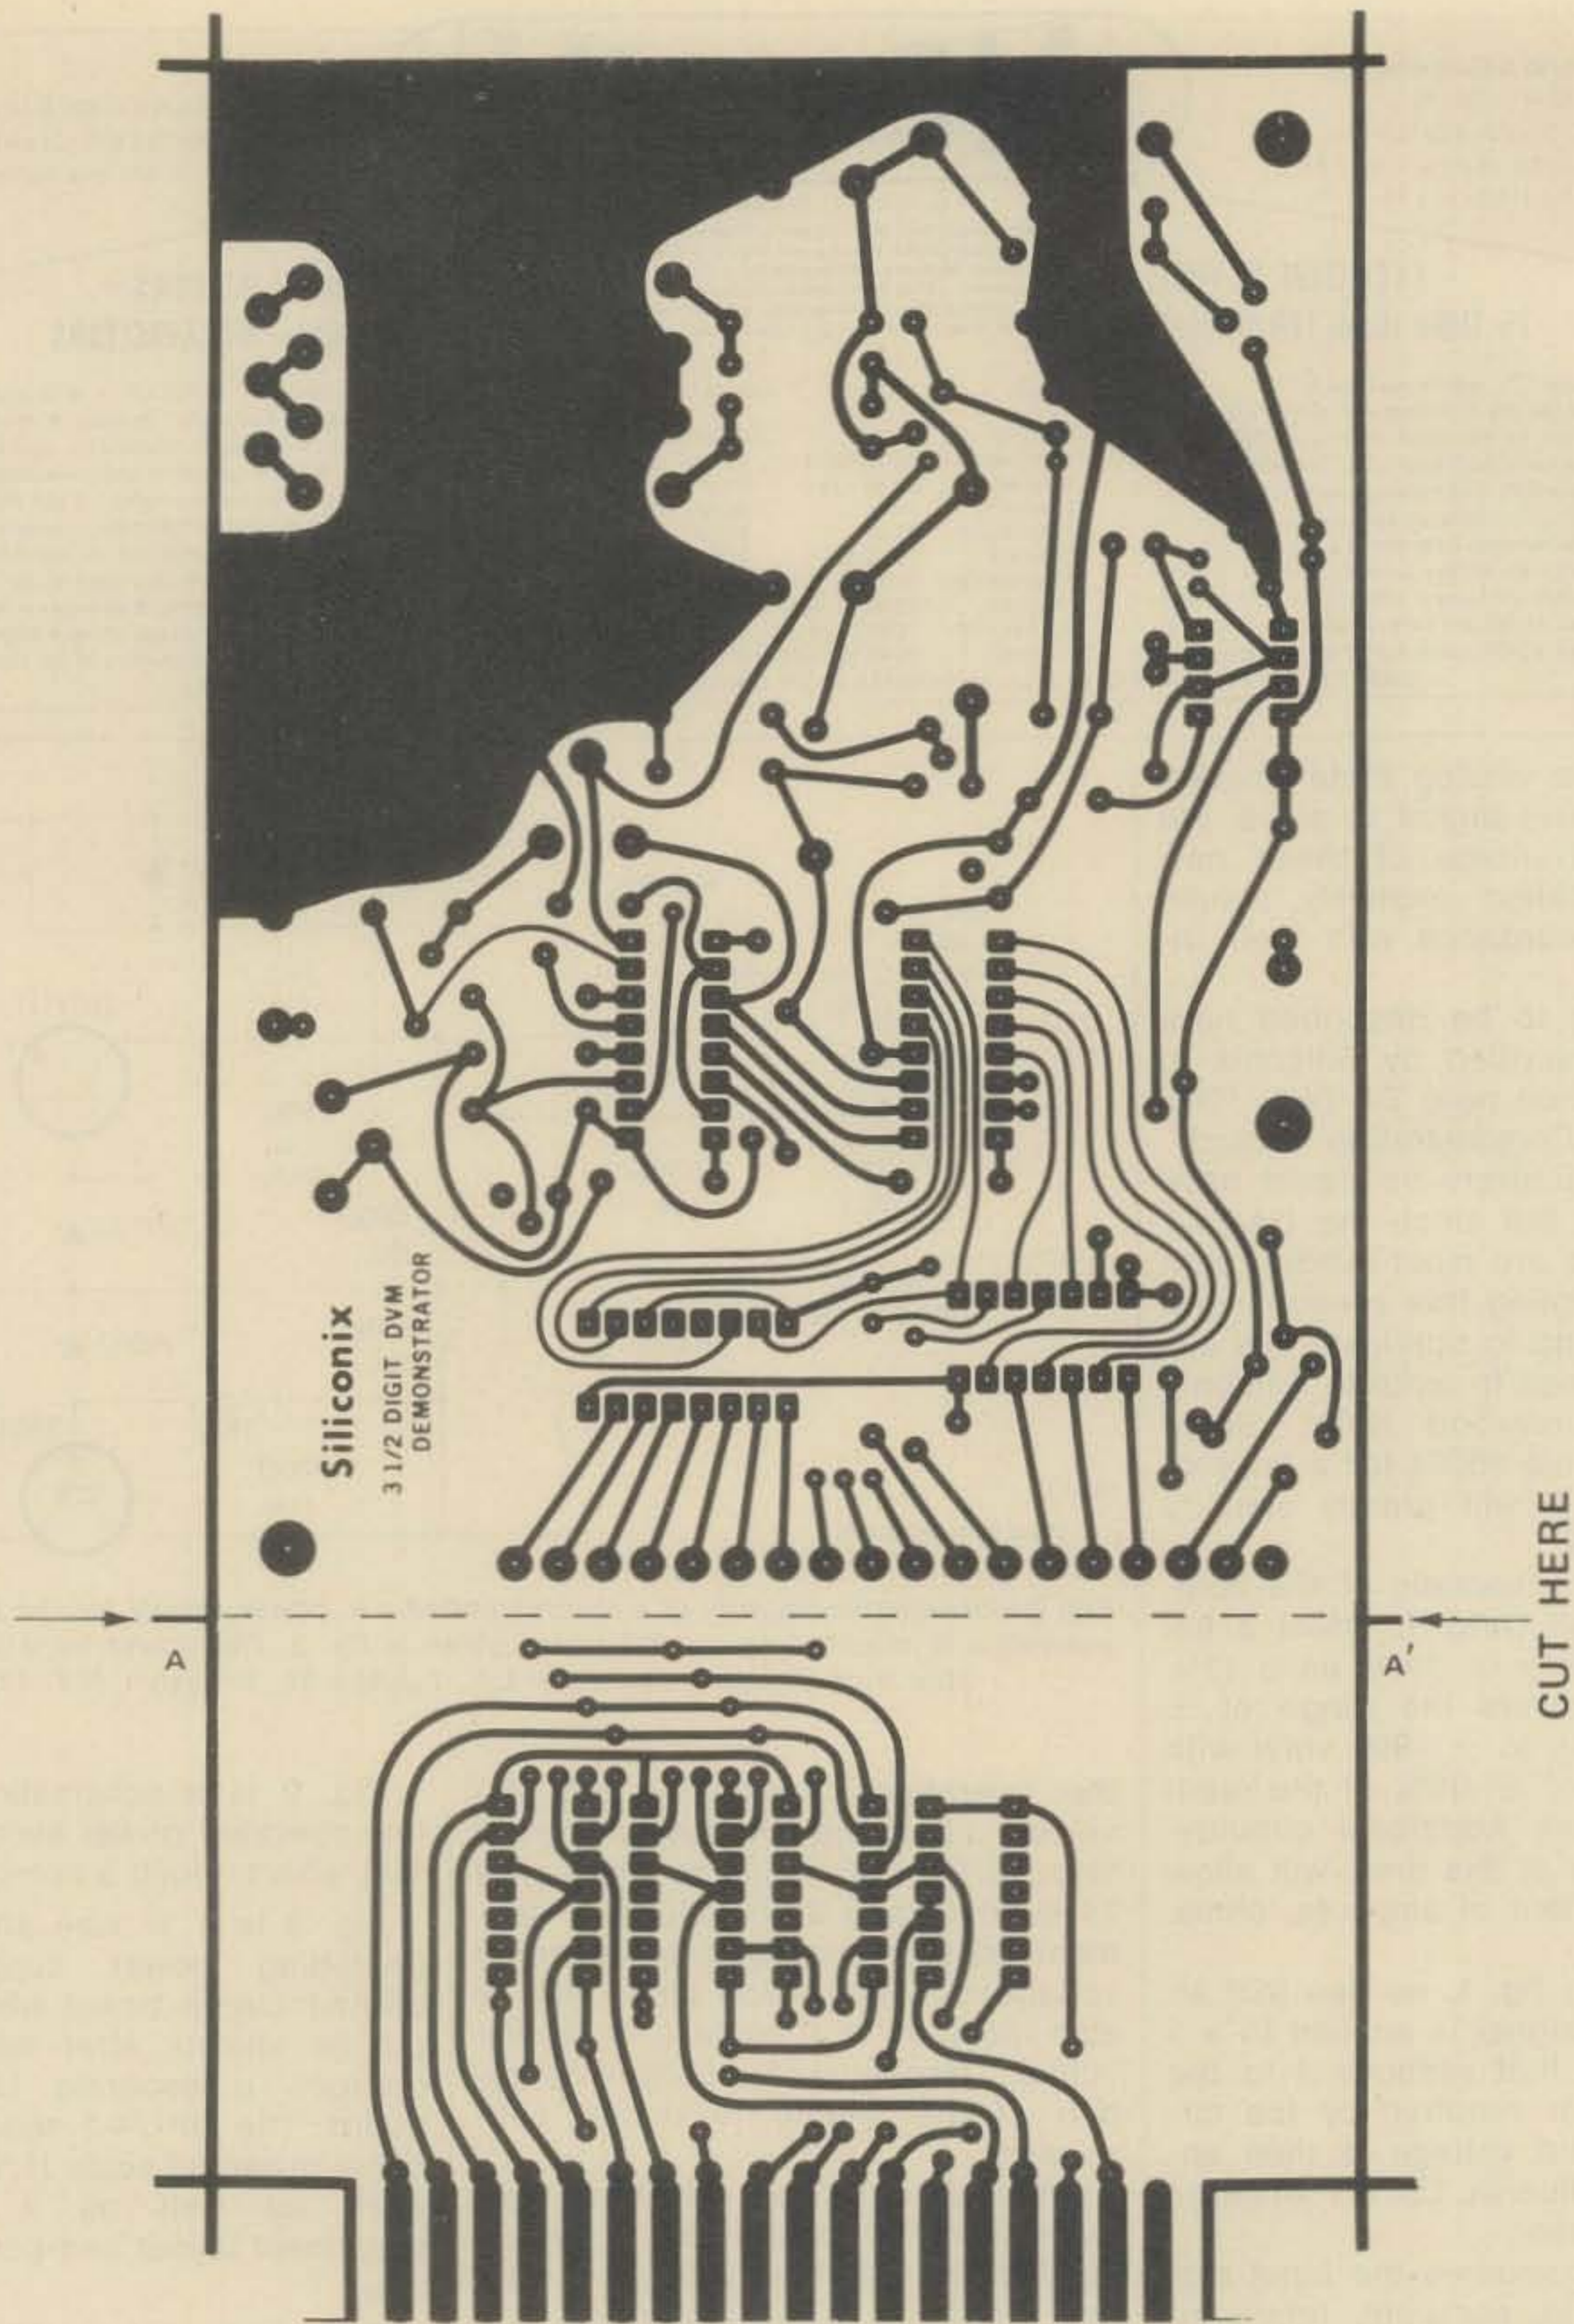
1:1 Artwork won the DVM. The board should be cut after fabrication and a copy of DA-74-1 should be obtained for parts placement and further details.
